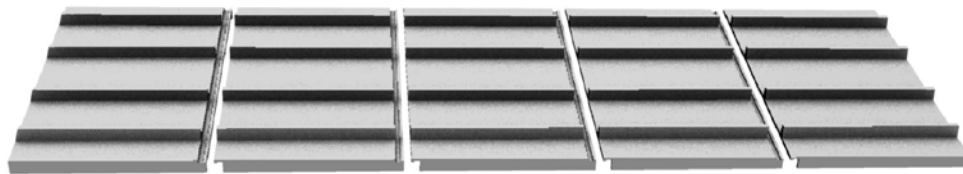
Multi-segment bottom plate of a bogie hearth furnace cast from G-X40CrNiSi27-4 or G-X40CrNiSi25-20 alloys [5]
